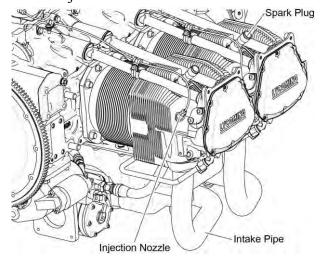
Spark Plugs, Intake Pipes, and Injection Nozzles
